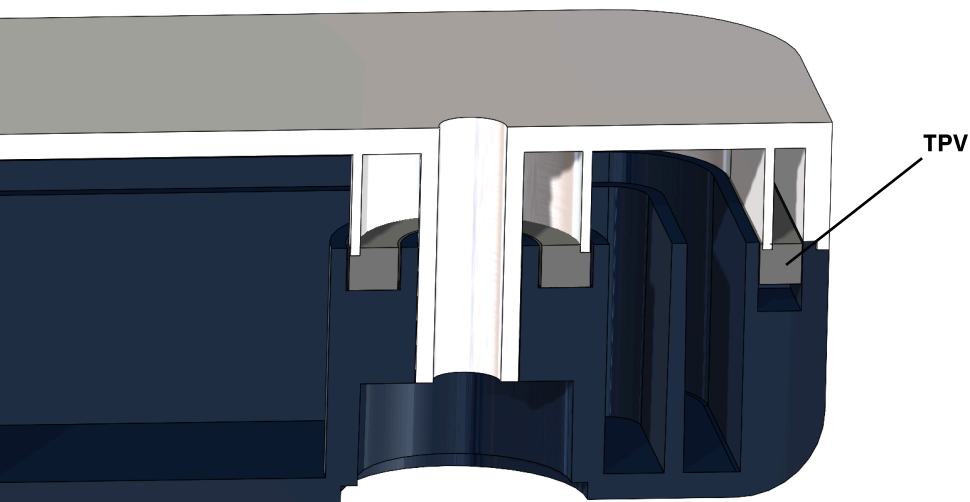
Outer and inner rubber seal locations with indicators of the two places that could cause water ingress
